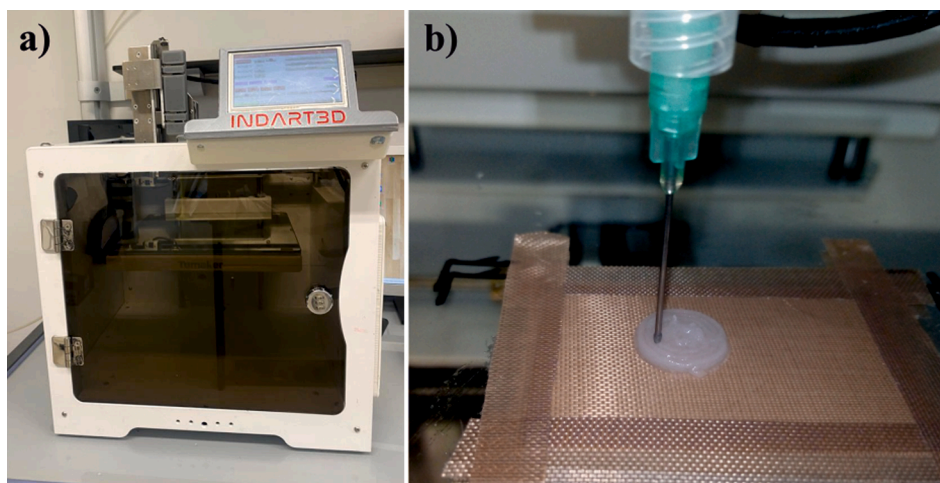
a) Photography of Voladora 3D printer (Tumaker) and b) photography taken during the printing process.
